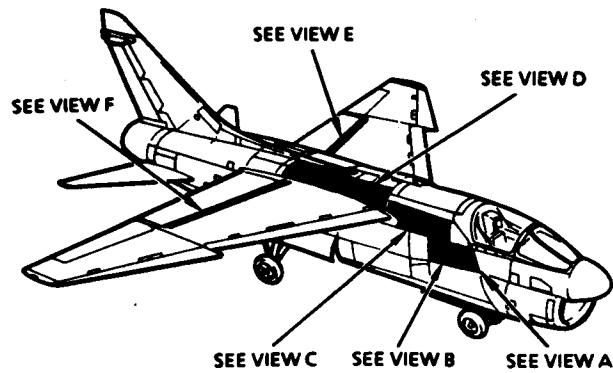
A. Clamping and Routing of Wingfold Push-Pull Control Assembly (Sheet 7 of 7)
